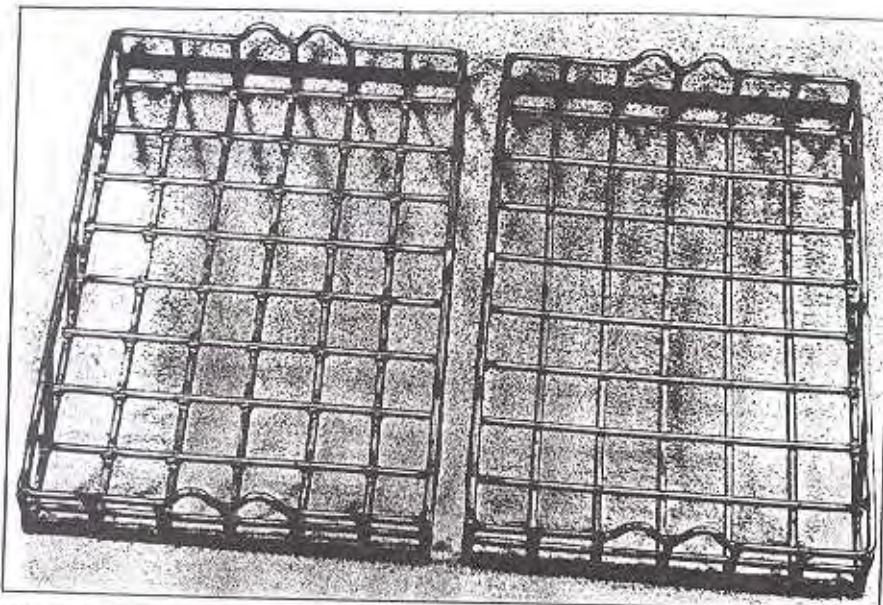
Types of baskets used in field performance tests. Runner bars, long members at bottom of basket, are subject to sliding wear. In basket at left, crossbars are joined to runner bars with weld metal in addition to pressure weld.
